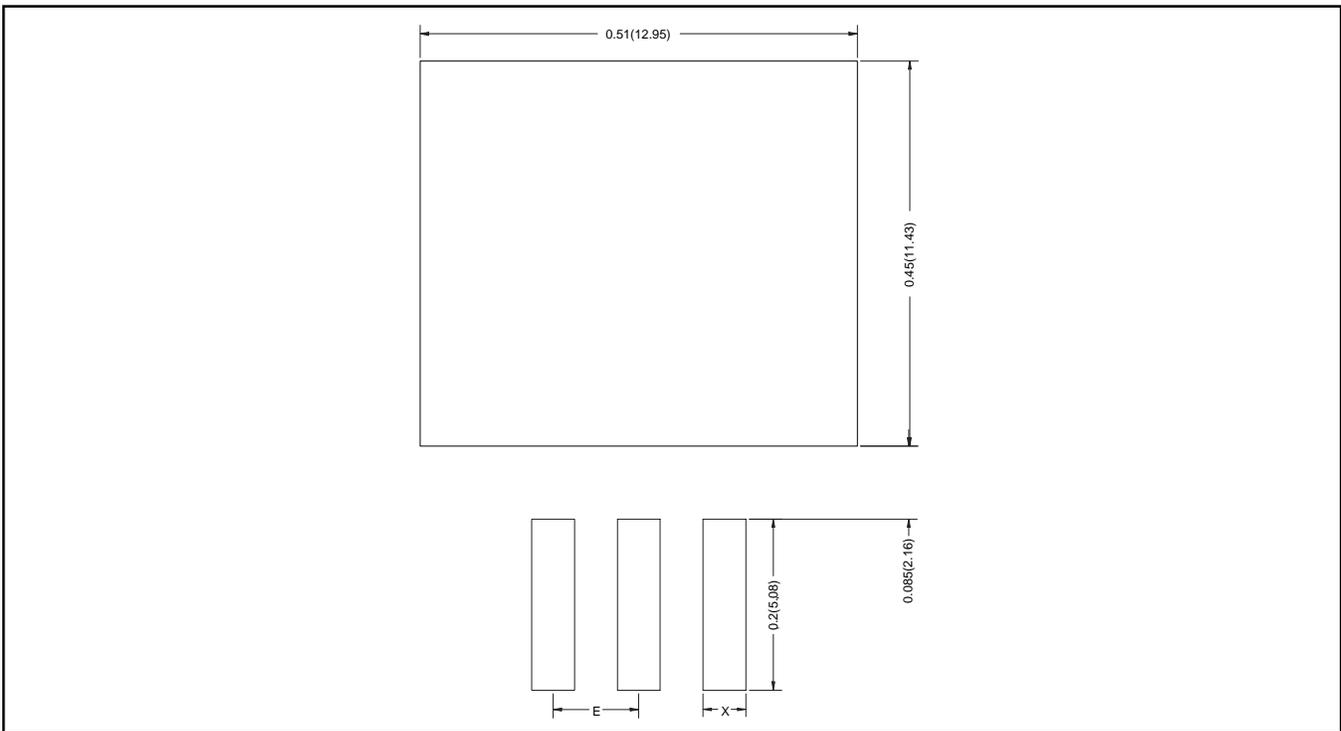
PCB Pad Dimensions for DDPAK—inches (mm).
